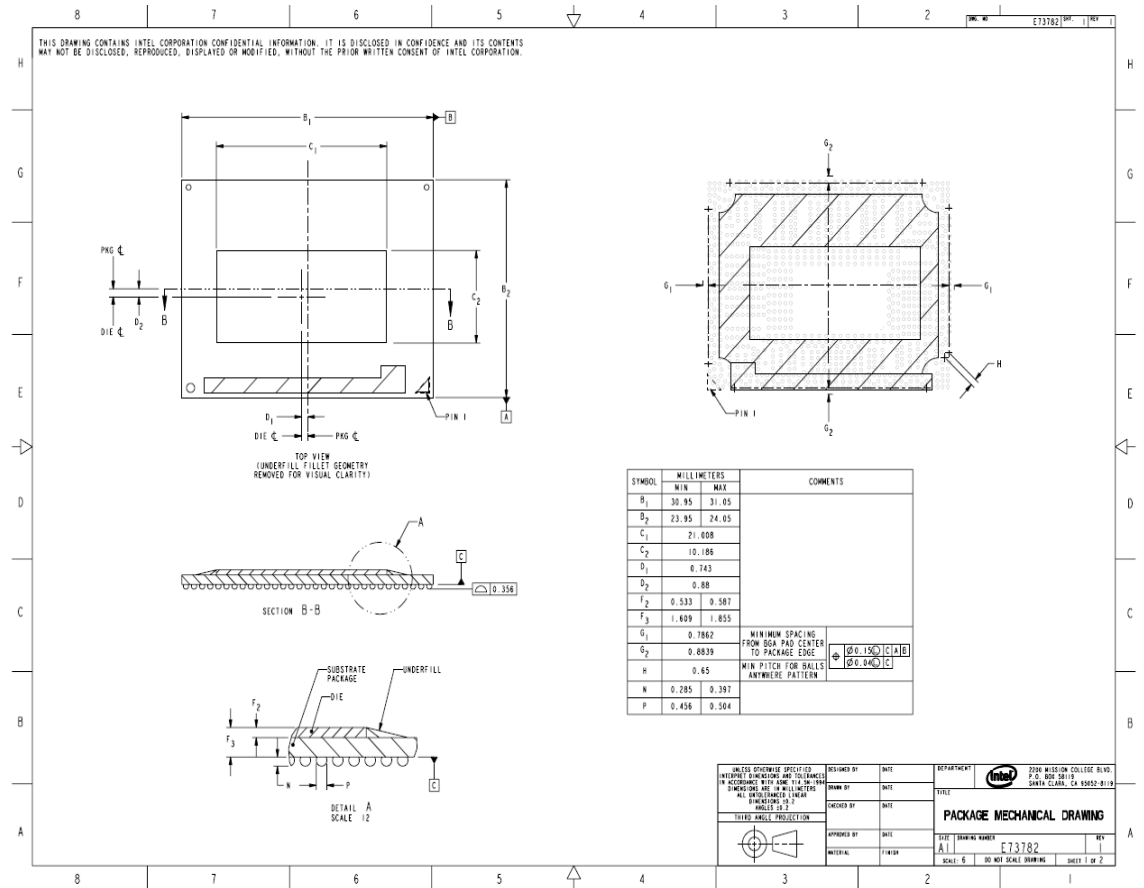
Sandy Bridge-Mbl +ECC Four-Core-Die 1023 Ball BGA Package Mechanical Drawing 2
